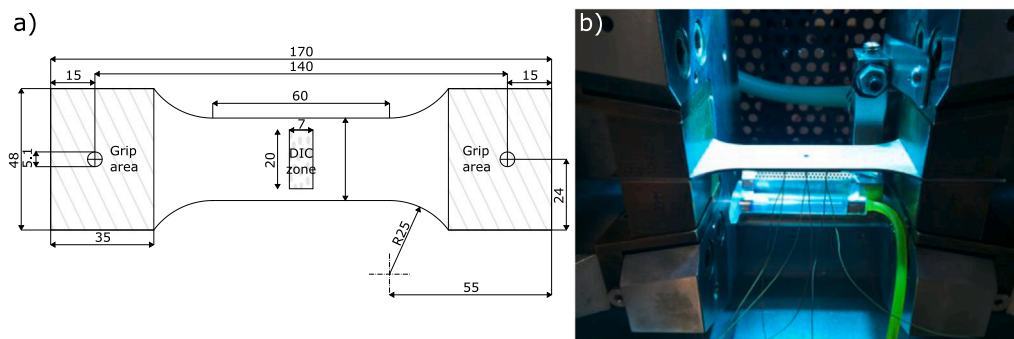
Uniaxial tensile test: (a) Sample geometry; (b) Test sample in the Gleeble 3500 machine.
